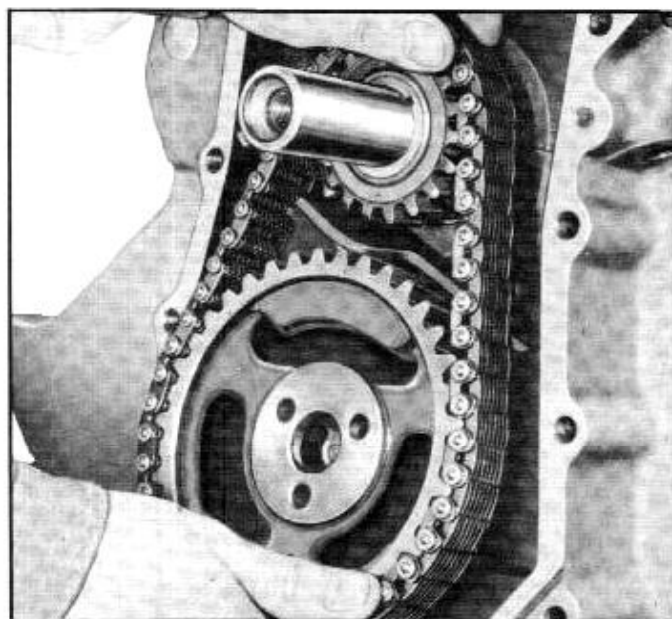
C-95—Removing Camshaft Sprocket and Timing Chain
